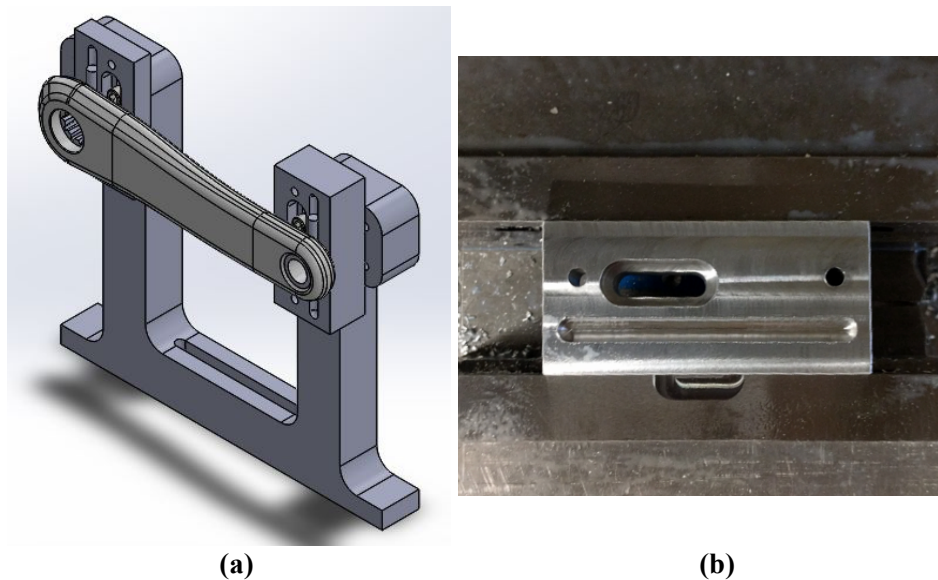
(a) Fixture concept showing U-shaped base with two mounting blocks. The tabs located on the bottom are locations for two toe clamps. (b) As-machined backing block
